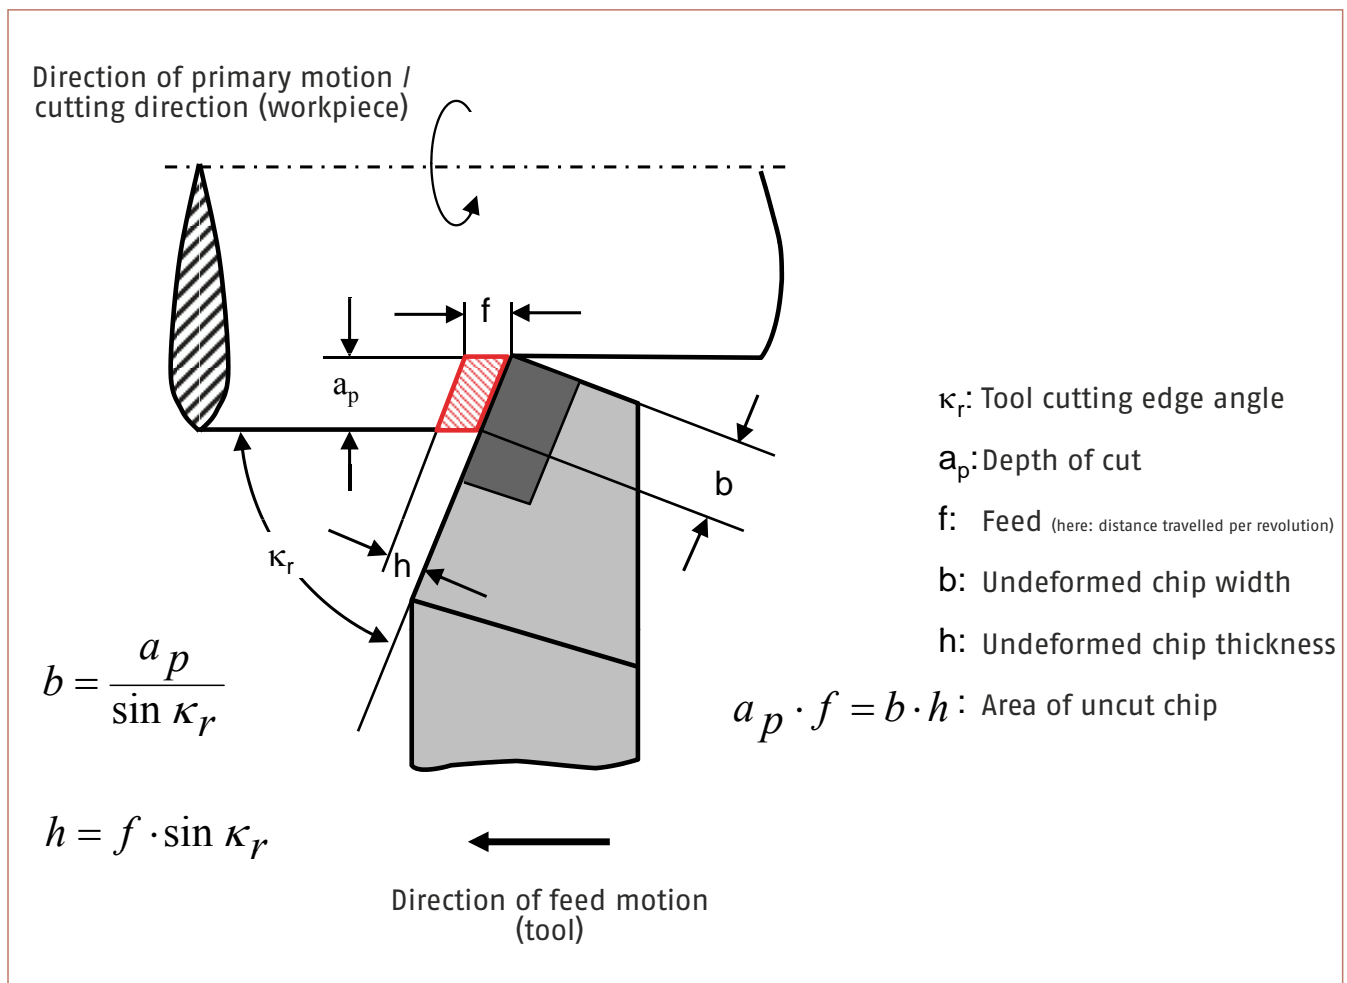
Geometry of tool engagement during cylindrical turning (oblique cutting configuration) (DIN 6580)
